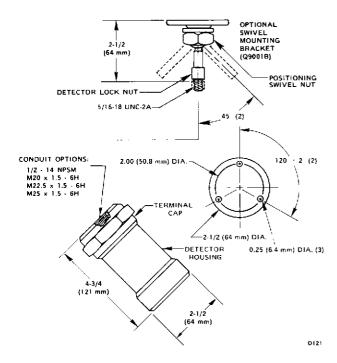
Dimensions of the C7050 Detector in Inches (mm)
